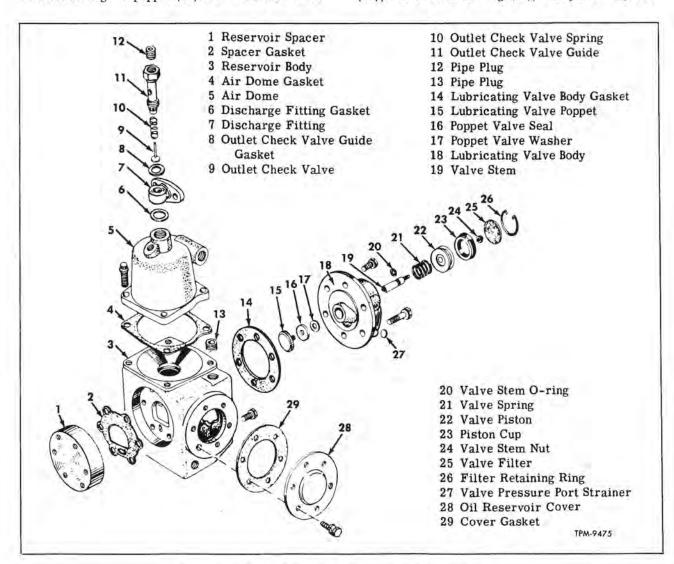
Air Dome, Reservoir, and Lubricating Valve Components
